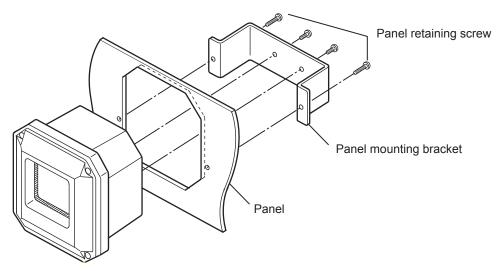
Mounting Method for Ultrasonic Oscillator Using Panel Mounting Bracket
